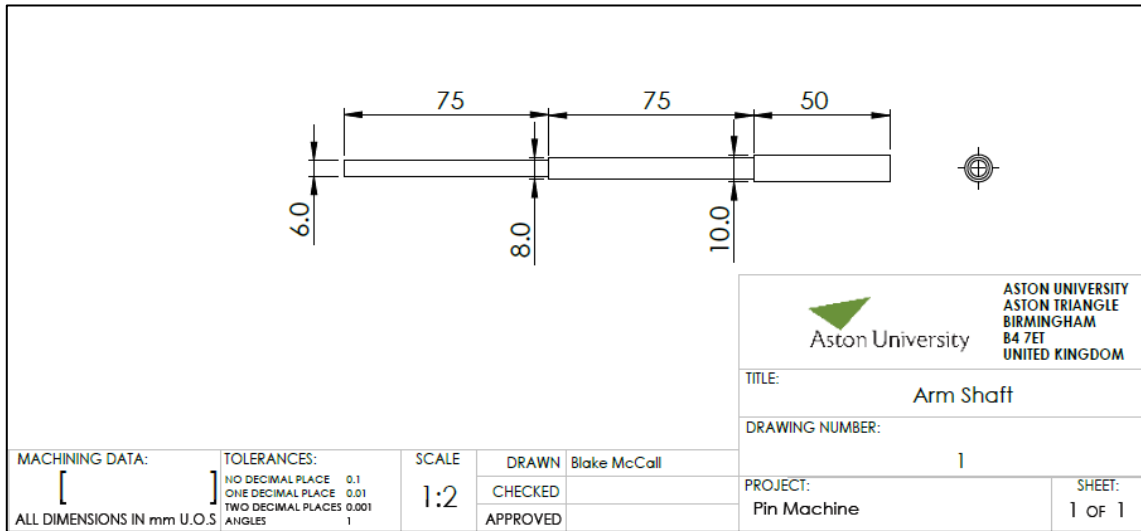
Working drawings of the Arm Shaft Component of the Pin Machine
